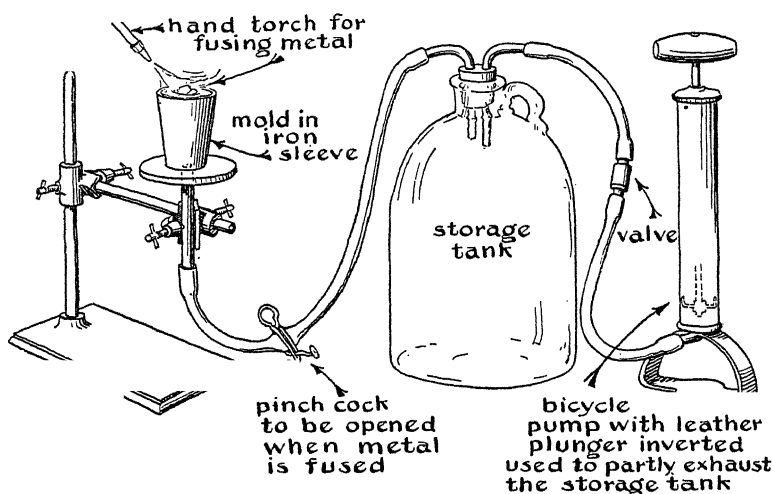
Lost-wax casting. Vacuum method for filling the mold.
